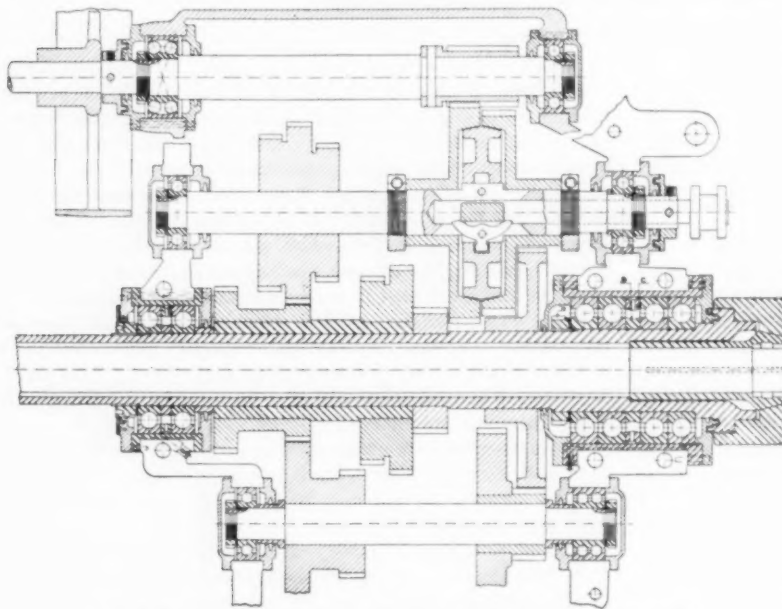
APPLICATION OF BALL BEARINGS TO A GEARED-HEAD LATHE
